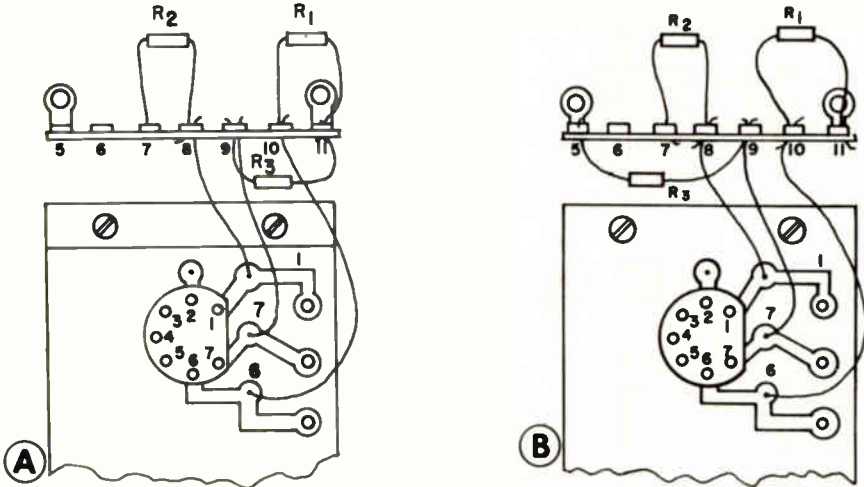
Examples of how you could have wired the circuit used in Experiment 4.
